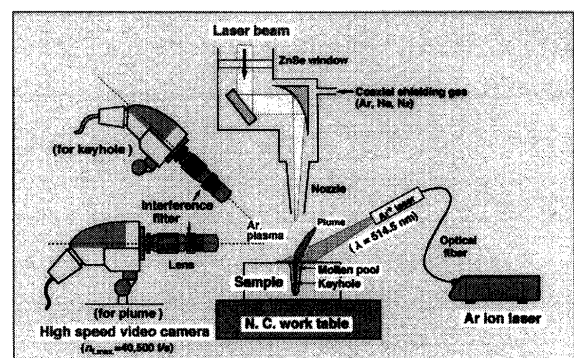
Schematic arrangement of optical observation system for laser welding phenomena.
